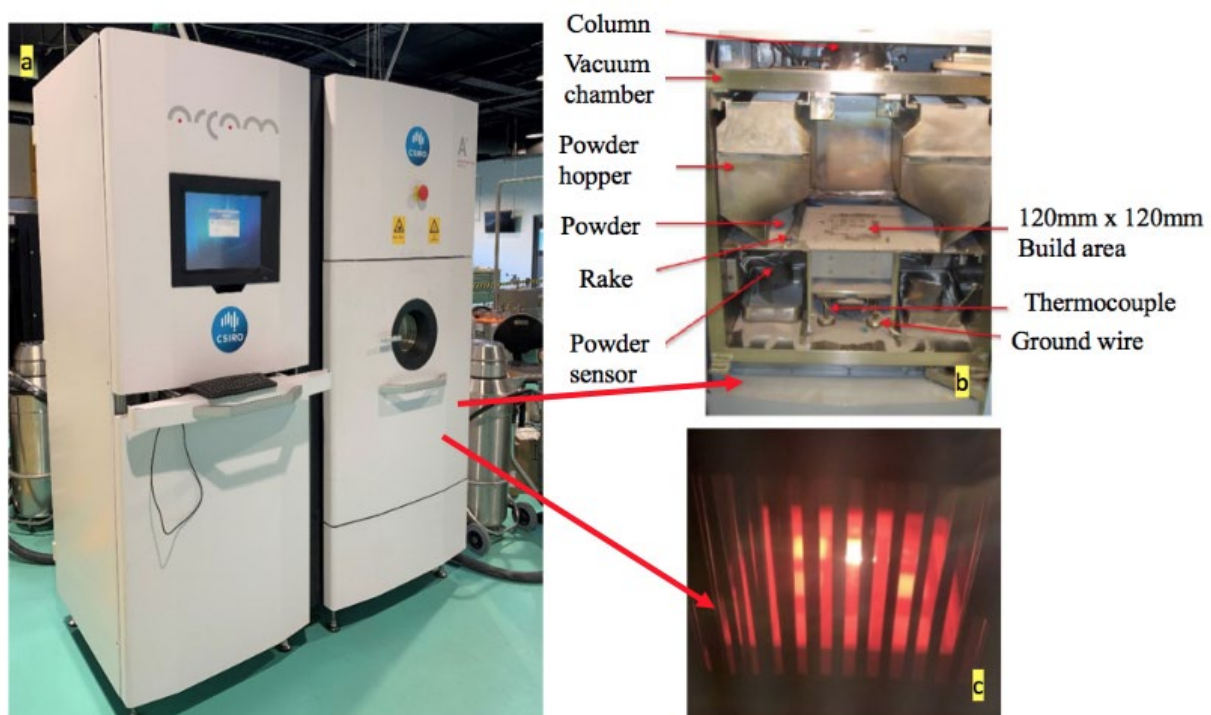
EBM machinery (a) shows the Arcam AB EBM machine at CSIRO (b) interior of machine (c) interior when printing is being done.
